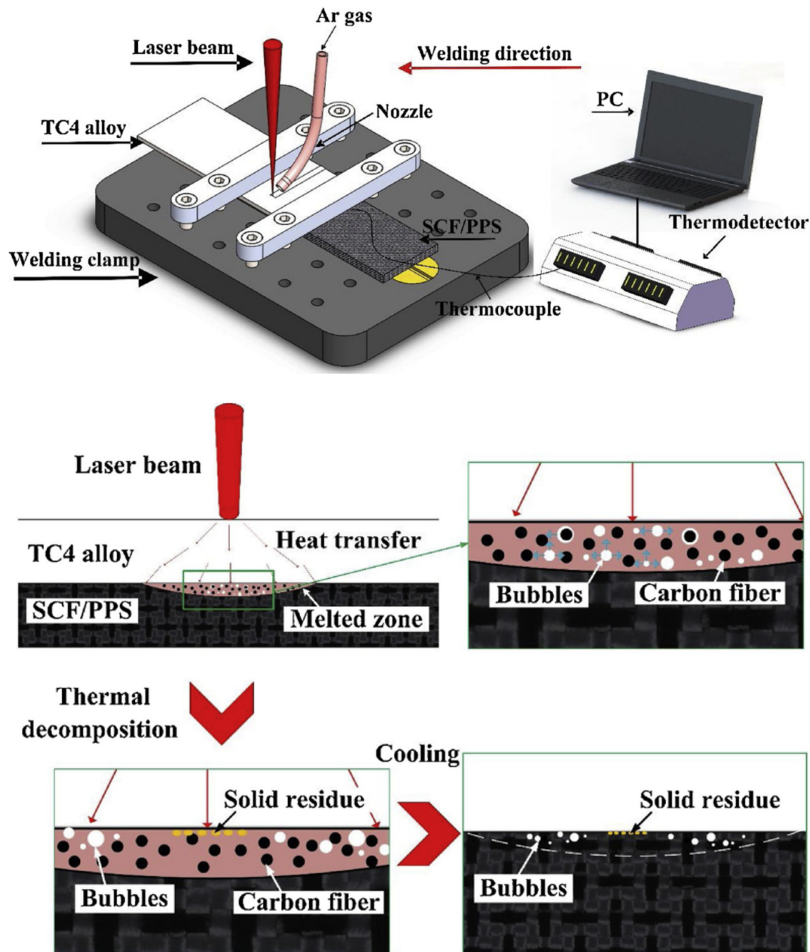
Experimental setup and principle for laser welding of composite to the titanium alloy
